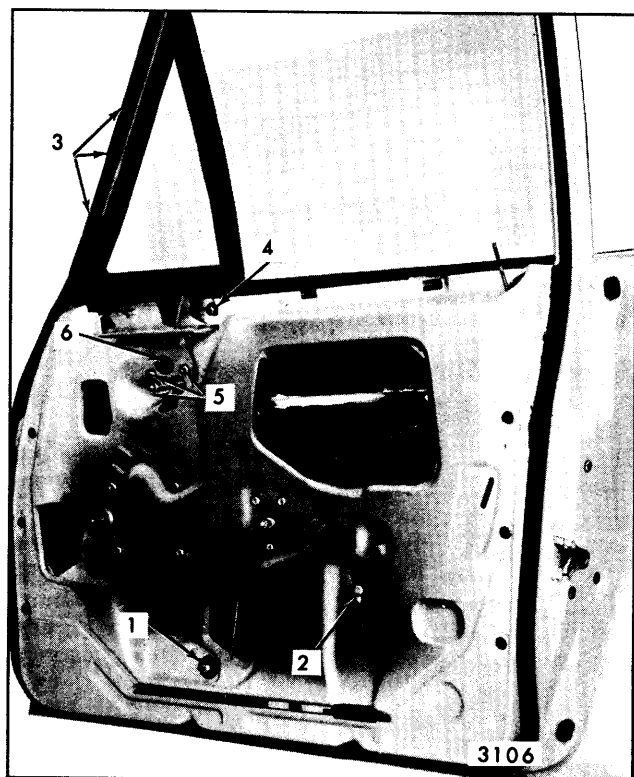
Front Door Ventilator and Window Removal and Adjustments - "A" Closed Styles
